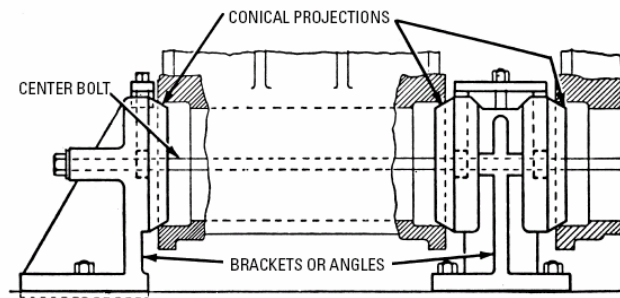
A fixture used to hold locomotive cylinders in position for planing the surfaces of the saddles.[6]
